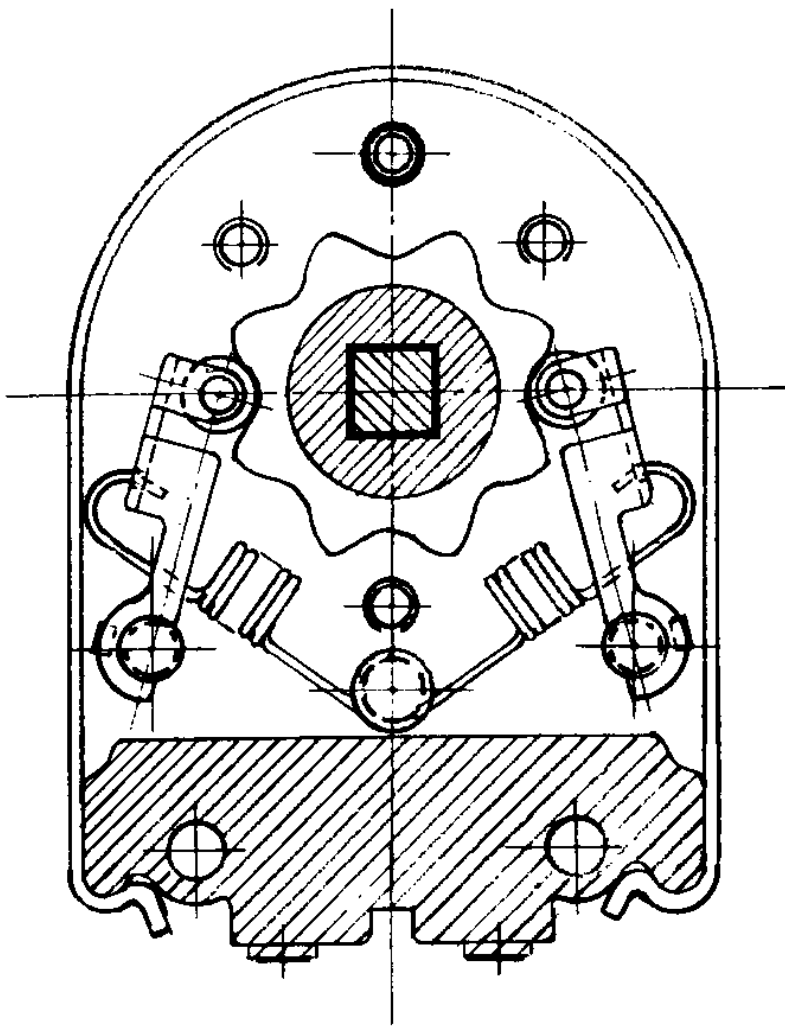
Front end plate showing star-shaped positive positioning device.
